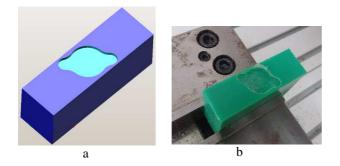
Test part for 3-axis machining: a - 3D model; b - machined part.
